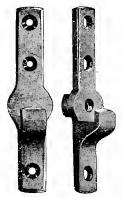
Straight Seat Arm Stops. Adams & Westlake Company.
